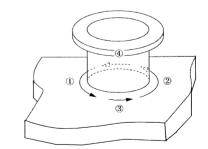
Symmetrical tack welding on strongly restrained thick section work
